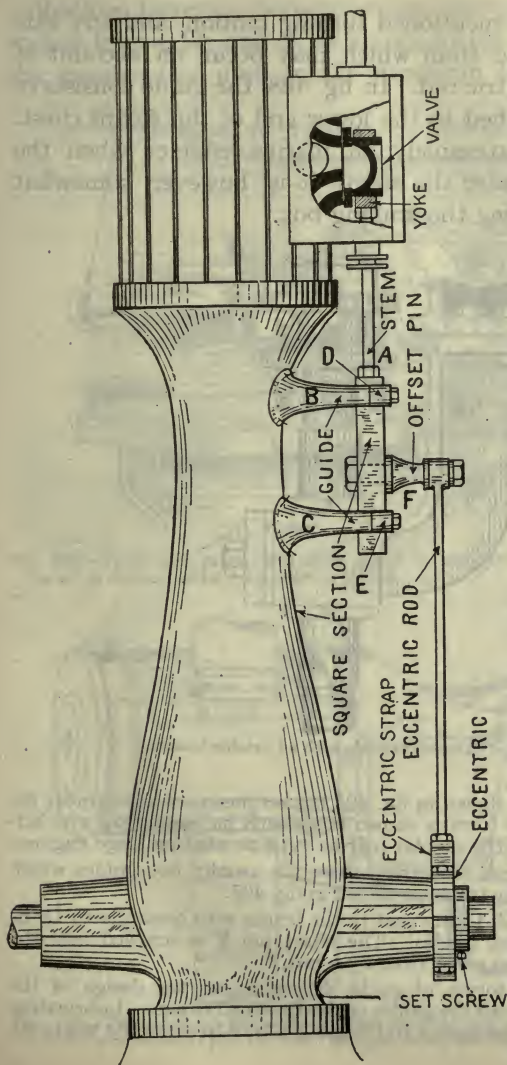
Simple valve gear with offset eccentric. The stem is in two parts, the stem proper, and a square section working through guides, and to which is attached an offset pin.
